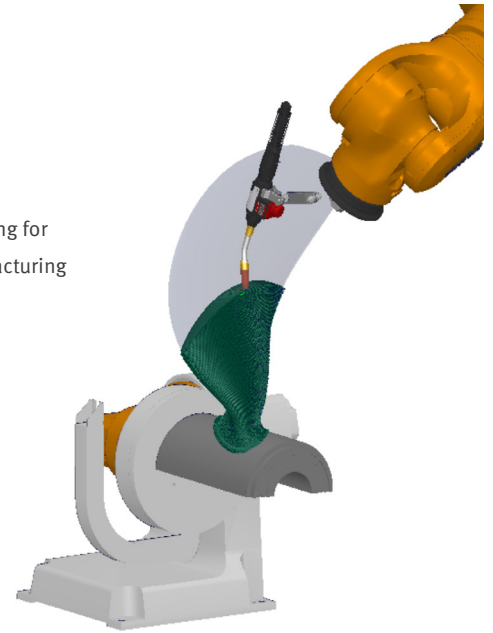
Figure A shows the path planning for build-up welding, which adapts to the geometry layer by layer. By combining welding, measuring, and milling processes in the robot-supported machining cell, hybrid production can be implemented with the component in one clamping. A turn/tilt positioner ensures optimum alignment of the component to the robot, with the robot guiding the respective tool. Extensive sensor technology and algorithms ensure reliable and high-quality production of maritime components.
